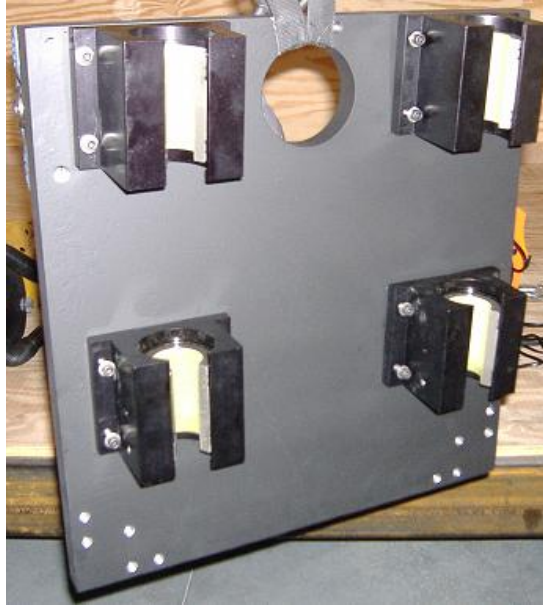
Component Mounting Fixture Backside With Linear Bearings. [Photo by author 2009]
